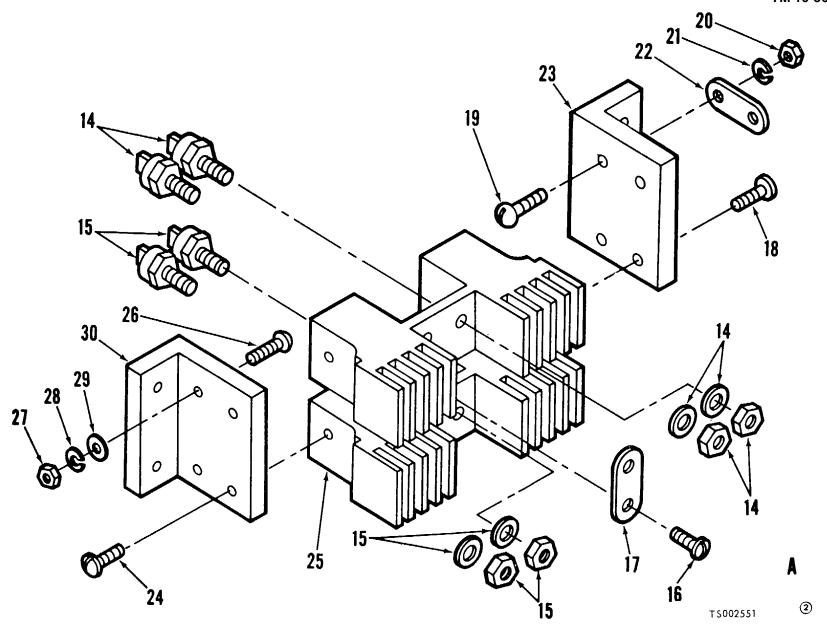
VSX Exciter Panel Assembly, (Sheet 2 of 2)
